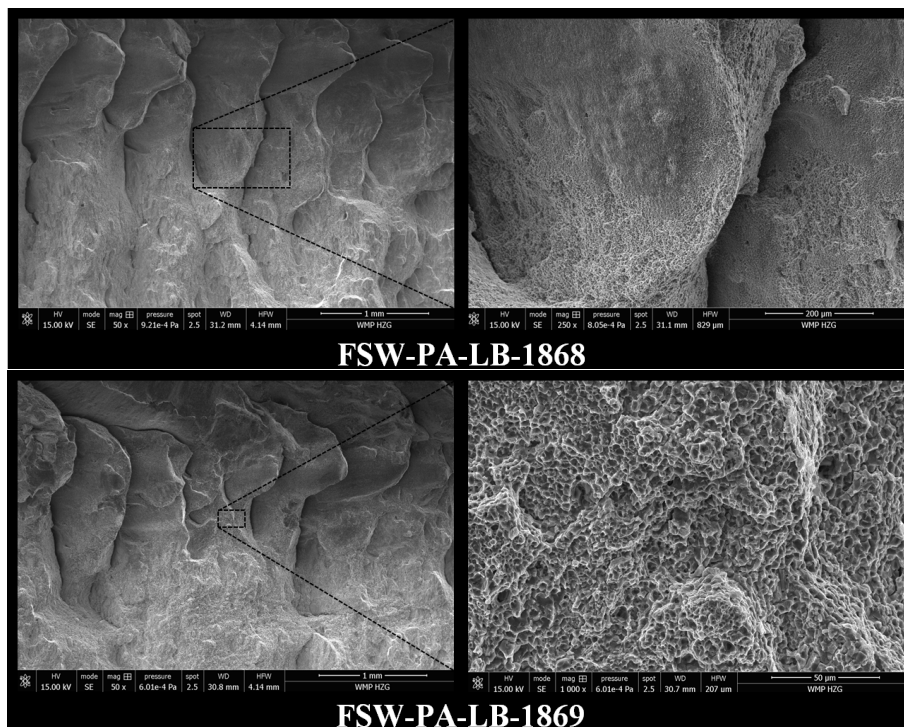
SEM micrographs of fractured surfaces of the FSW-PA-LB-1868/1869 welds.
